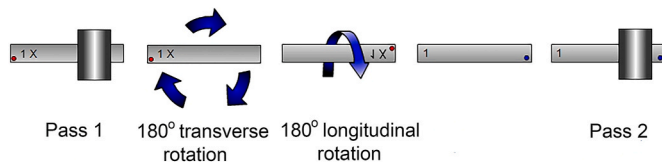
Rotation scheme of the assembly in hot-rolling.
